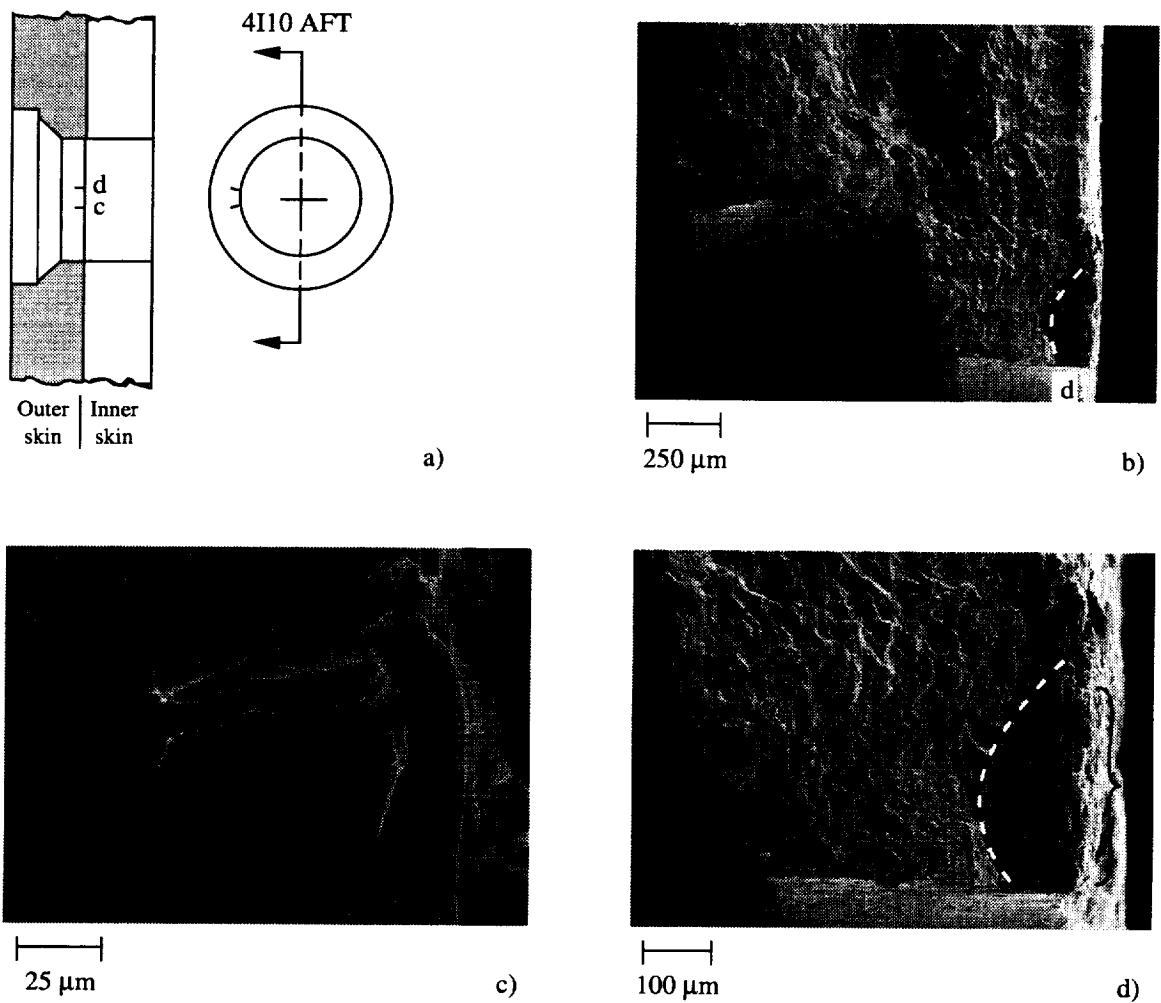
a) The schematic shows the rivet hole 4I10 configuration and the location of two outer skin fatigue cracks oriented in the aft direction and about the 9 o'clock position. b) The SEM micrograph shows the fatigue crack fracture surface located at the outer skin rivet hole (bottom). The dashed line marks the fatigue crack front. c) The SEM micrograph shows the inside surface of the rivet hole and a small partially opened fatigue crack (crack "c" in Figure 11.39.a) located at the inboard corner of the rivet hole. d) The SEM micrograph shows the fatigue crack fracture surface (crack "d" in Figure 11.39.a) at the rivet hole shank region at high magnification. The bracket marks the likely region of crack initiation along the faying surface and the dashed line marks the fatigue crack front.
